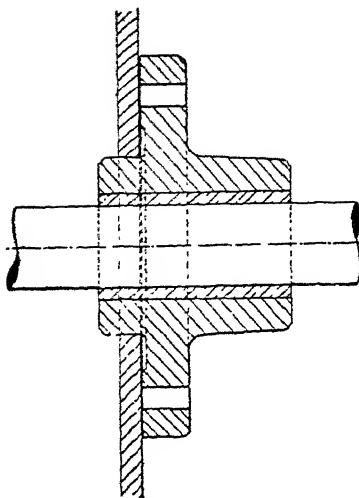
BEDDING SPIGOTED BEARING AGAINST PLATE
